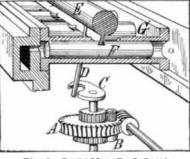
DETAILS OF SLIDING CYLINDER PUMP.
